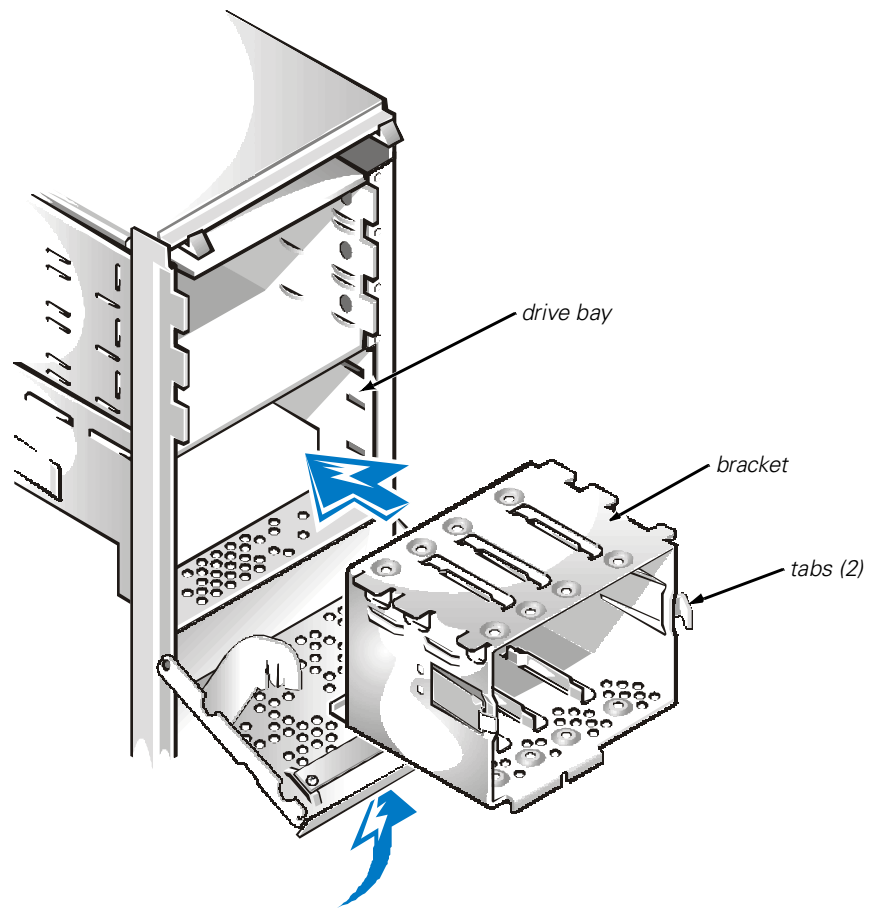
Inserting the Hard-Disk Drive Cage Into the Chassis
